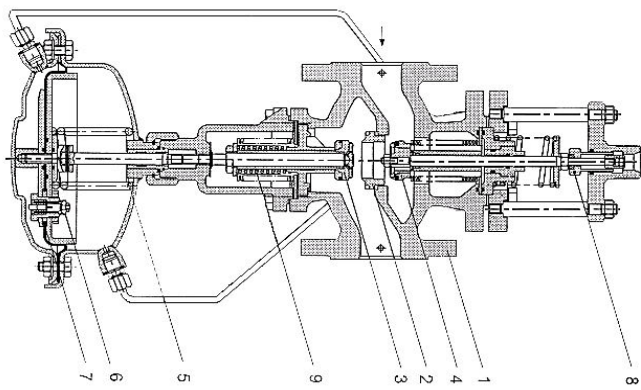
Cross section of a combined valve: 1. Valve housing, 2. Valve seat, 3,4. Valve mushroom, 5. Actuator housing, 6. Overpressure protection, 7. Moving diaphragm, 8. Adjusting nut, 9. Balance spring
